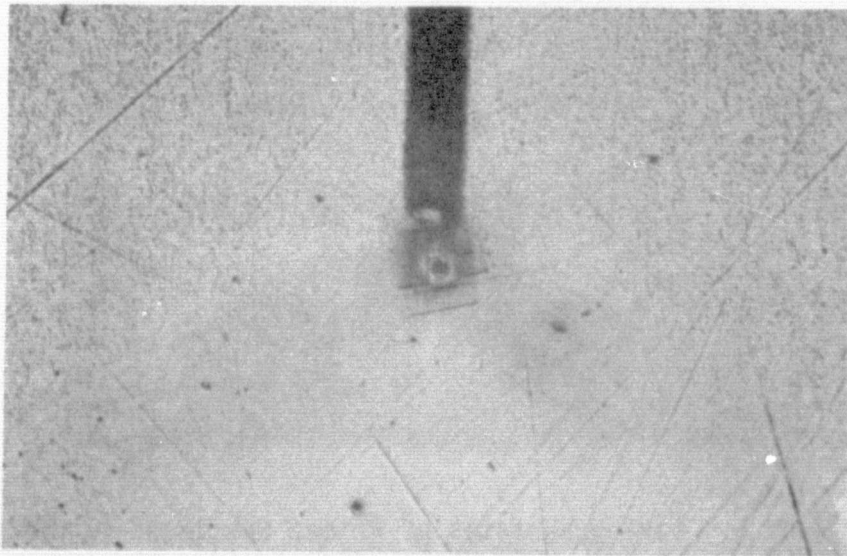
Control Weld Nugget at 50X. (Low magnification picture of sample. The darkened area, horizontal lines and round "hole" near the weld edge are due to microprobe beam damage.)
